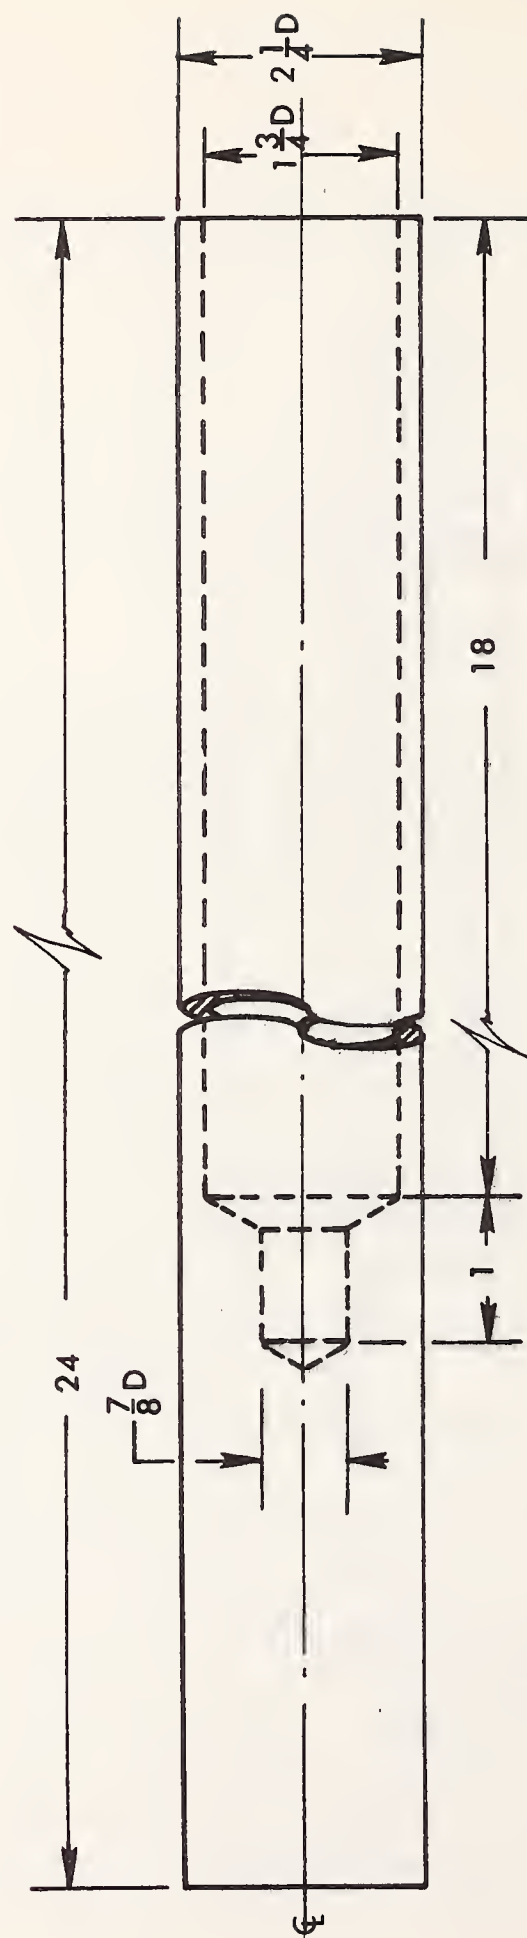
Mod 4 end fitting for 0.79-in (20-mm) diameter rods. Fitting is rotationally symmetric about longitudinal center line. All dimensions in inches (1 in = 25.4 mm).
